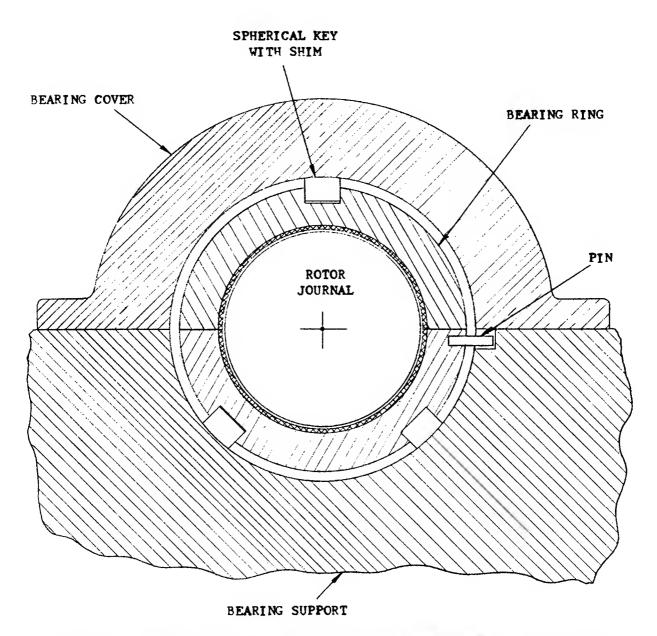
Section View Sketch Showing Spherical Keys. Not to Scale.
